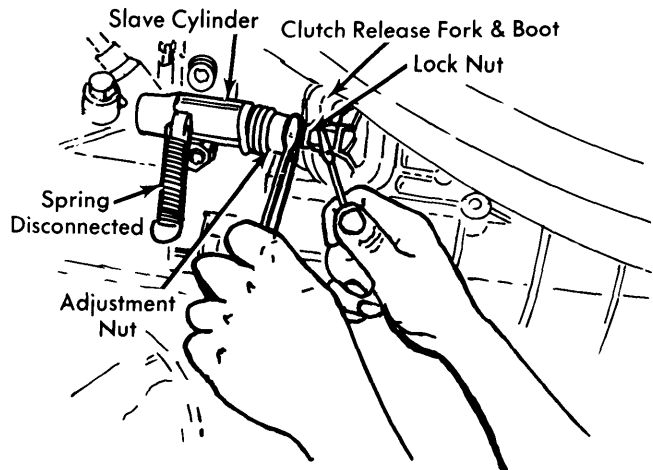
Making Clutch Release Fork Free Play Adjustment on 808 (1300 cc) Models
